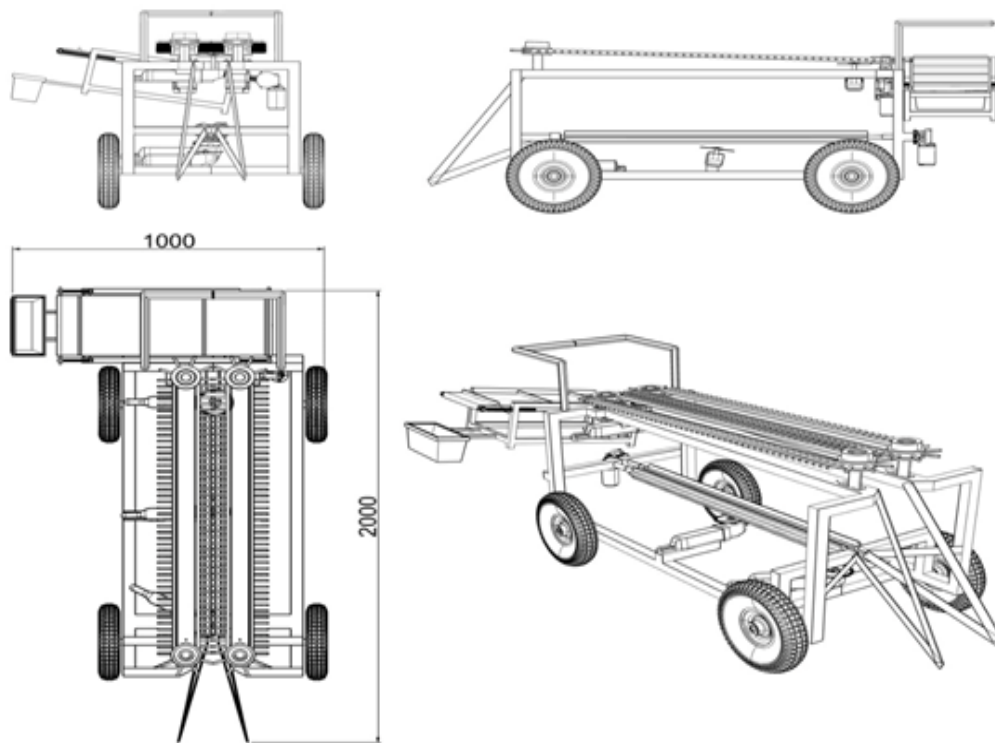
Technical drawing of the prototype machine showing the main structural components and functional layout.
